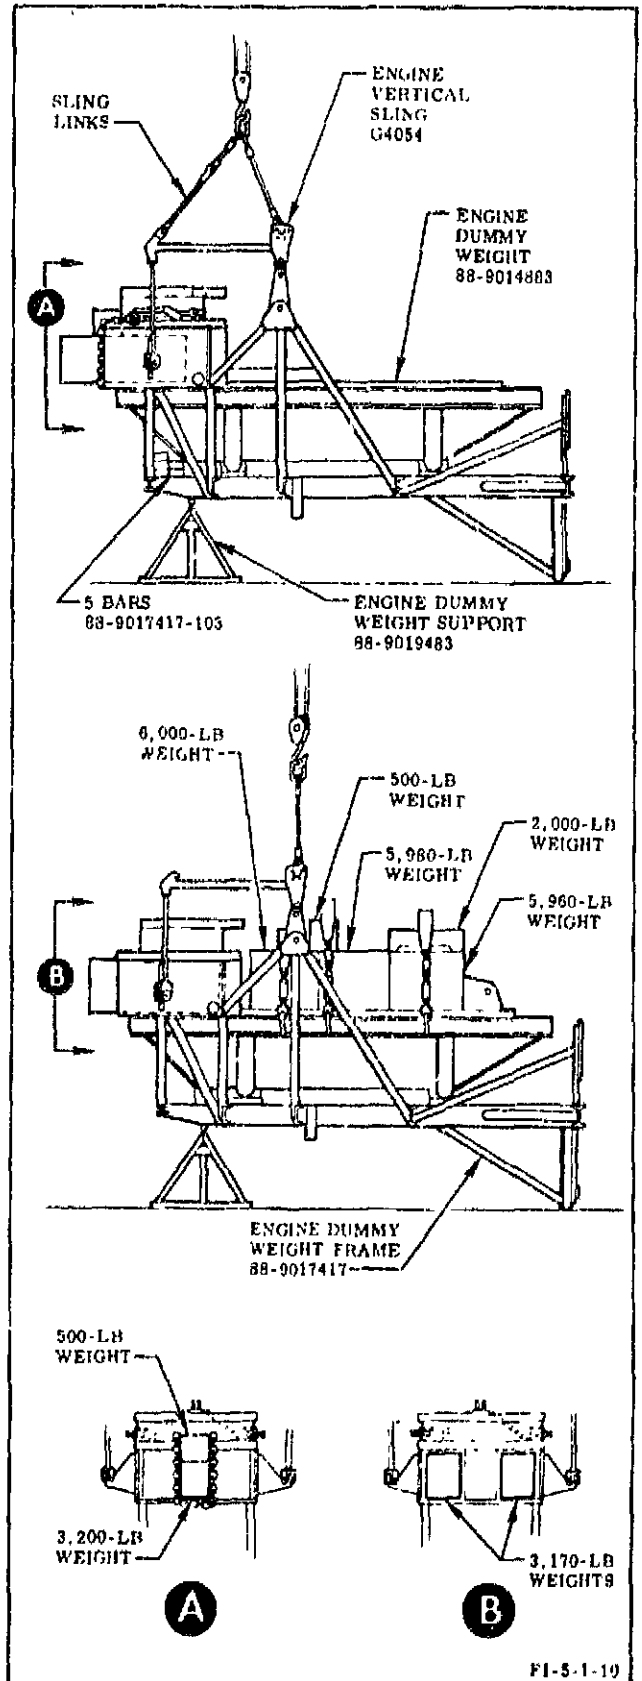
Recommended Proof-Test Setup for Engine Vertical Sling
